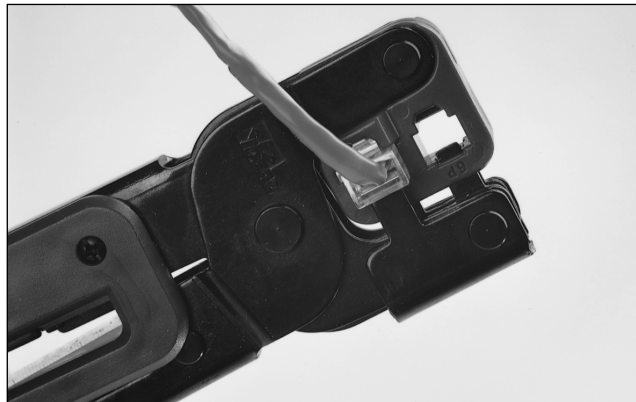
Firmly squeeze the crimping tool to attach the connector to the cable.
